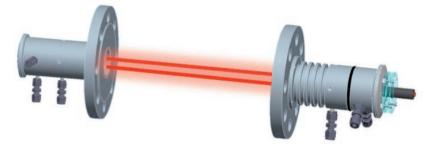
Fitting of laser pointer/reflective mode target to TDL head mounting.
